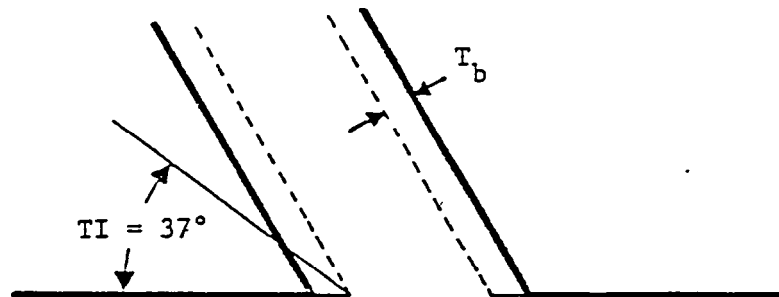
Minimum Allowable Weld Preparation Included Angle TI in a Welded Pipe Joint.
